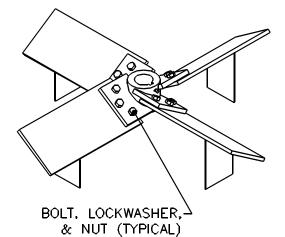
TYPICAL AXIAL FLOW IMPELLER ASSEMBLY (A45 SHOWN)
